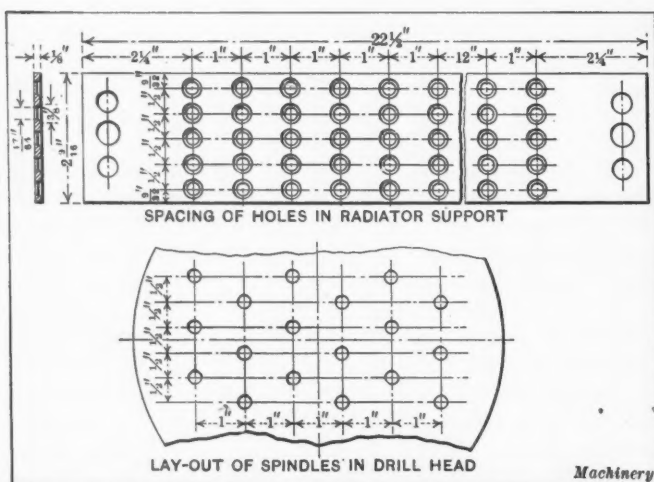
Radiator Support in which Holes are drilled with Langelier Head shown in Fig. 44, by traversing Work Sidewise and Lengthwise between Successive Operations. Below is shown Lay-out of Spindles in Drill Head
